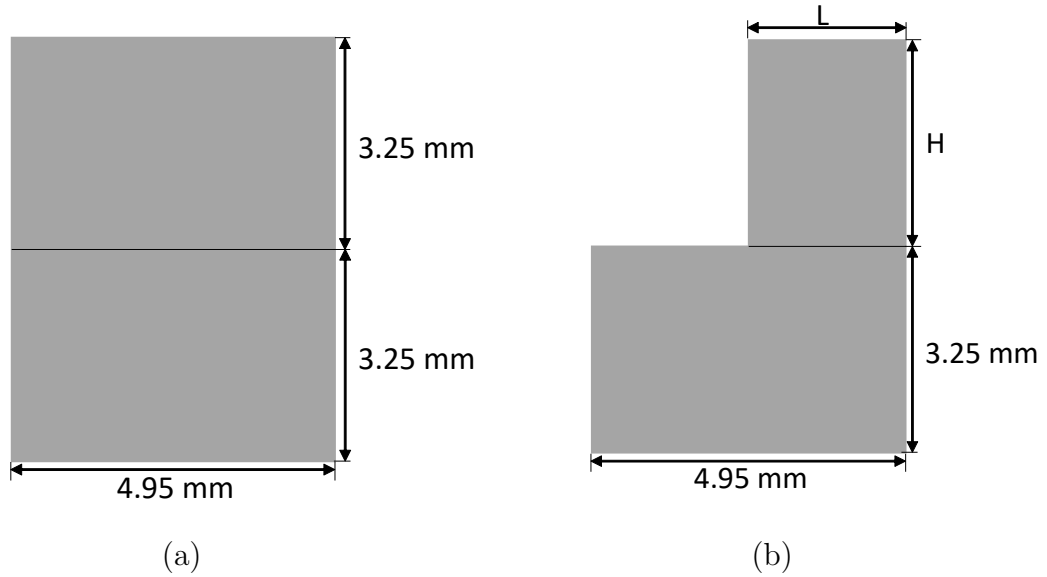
Schematics of (a) full-size sample and (b) stepped sample. The desired shearing interfaces are marked with solid black lines.
